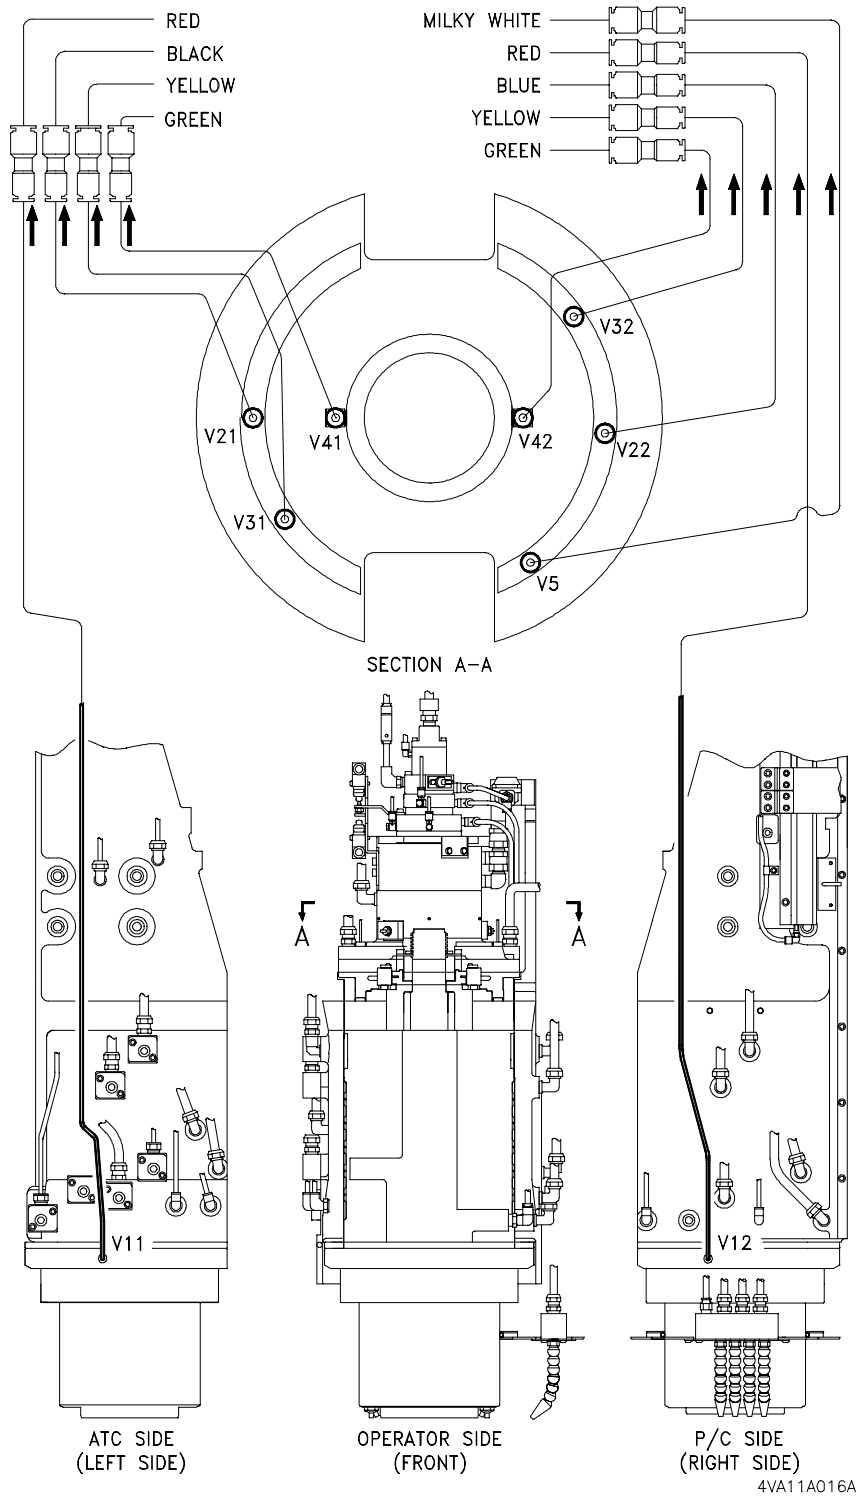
V PORT SPINDLE LUBRICATION
